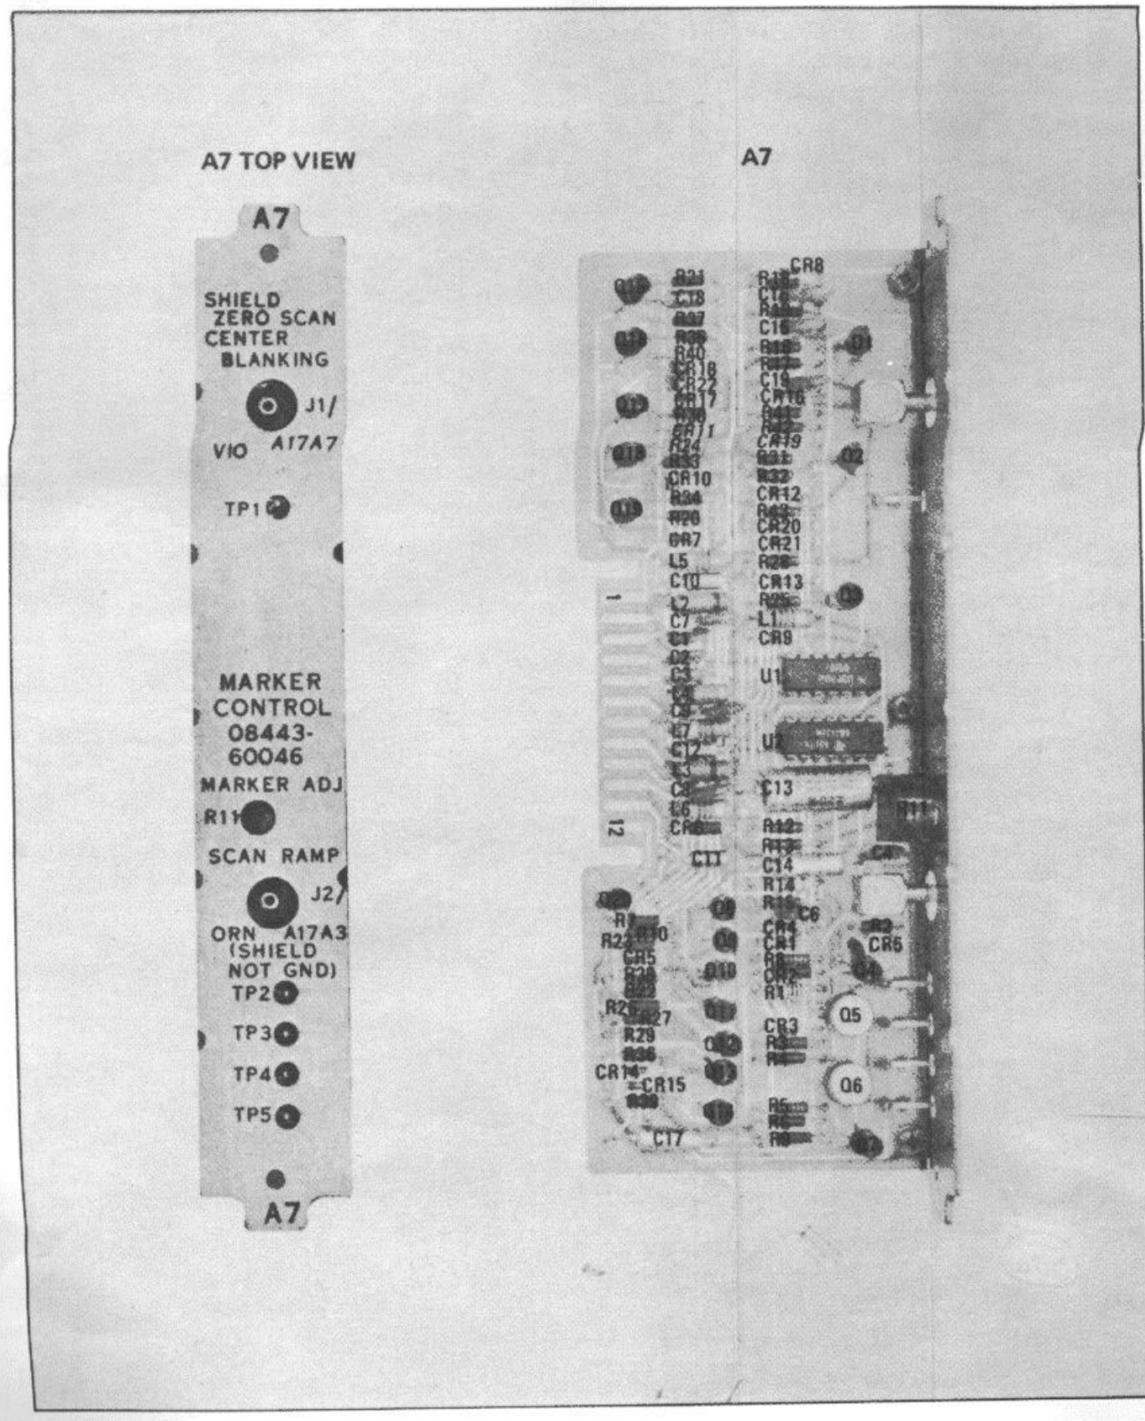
A7, Marker Control Assembly, Cover and Components
